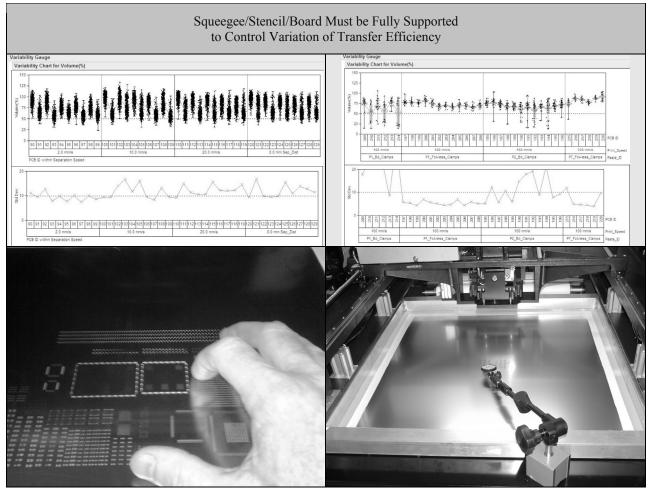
Detection of unstable board support system - test effect of stencil movement during squeegee stroke
